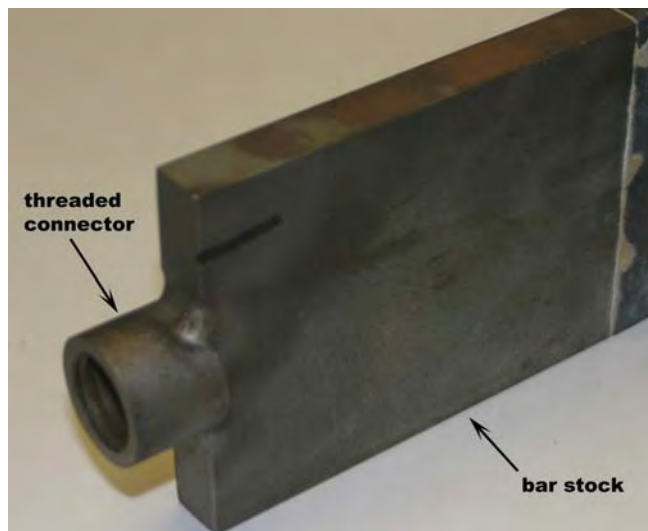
Tension test end cap, threaded connector welded to bar stock.
